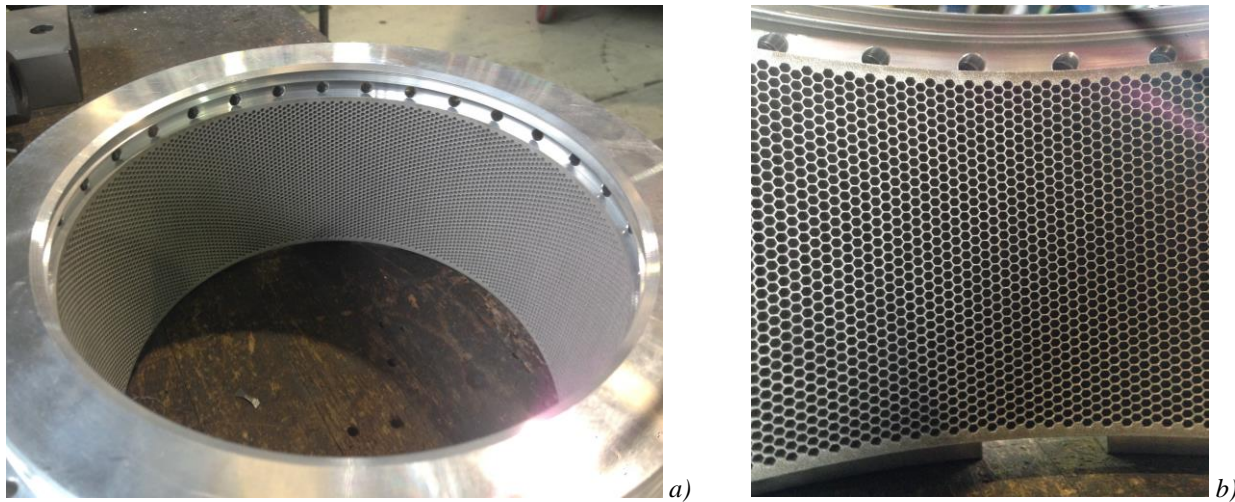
a) Honeycomb seal, electro-discharge machined from an aluminum alloy single block. b) Detailed view of the seal surface. Shunt holes are visible on the top side.
